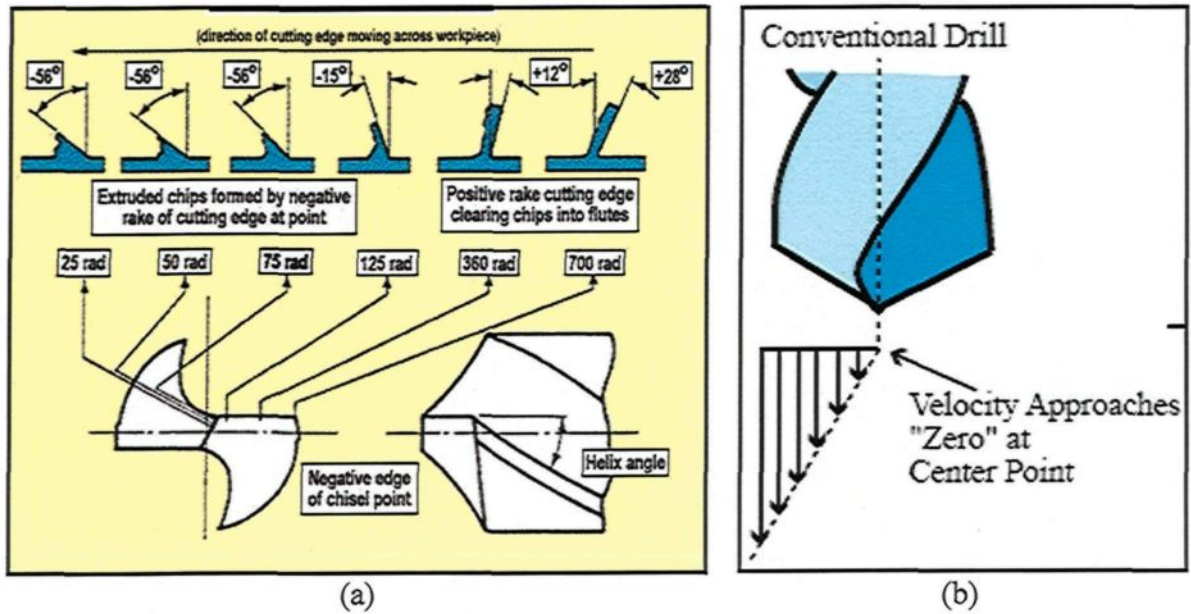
(a) Showing rake angle along the cutting edge moving across workpiece, and (b) showing variation in cutting speed with the cutting edges.
